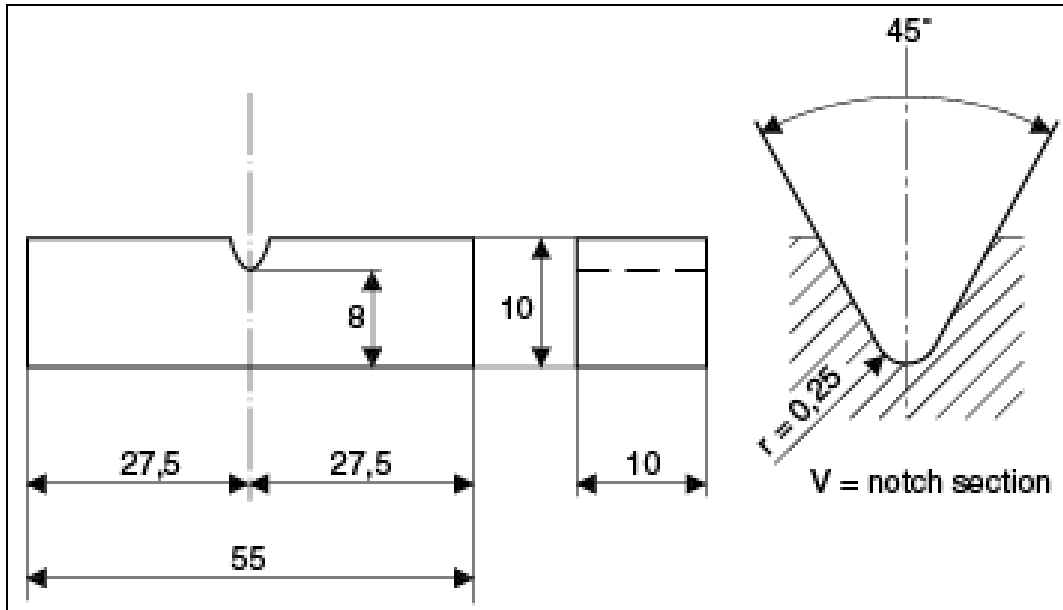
Charpy impact test specimen as per ASTM standard A-370
